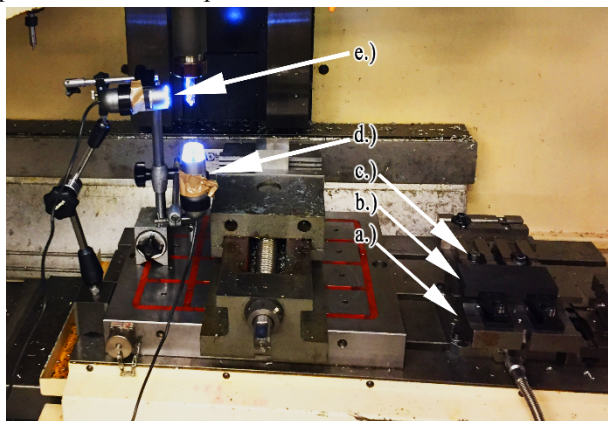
Experimental setup. a) UD-CFRP specimen; b) fixture c) KISTLER load cell d.), e.) digital microscopes
